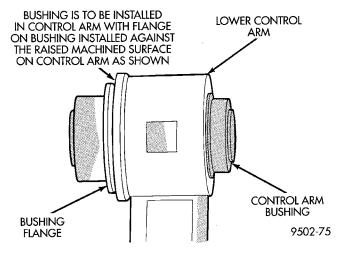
Installation Direction Of Lower Control Arm Front Bushing
